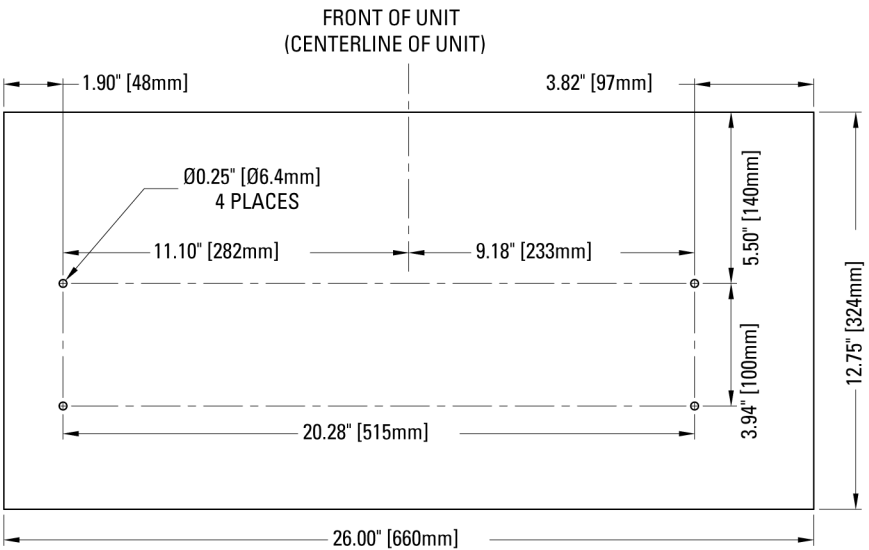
Hole Pattern on Bottom of Unit (top view of unit)
